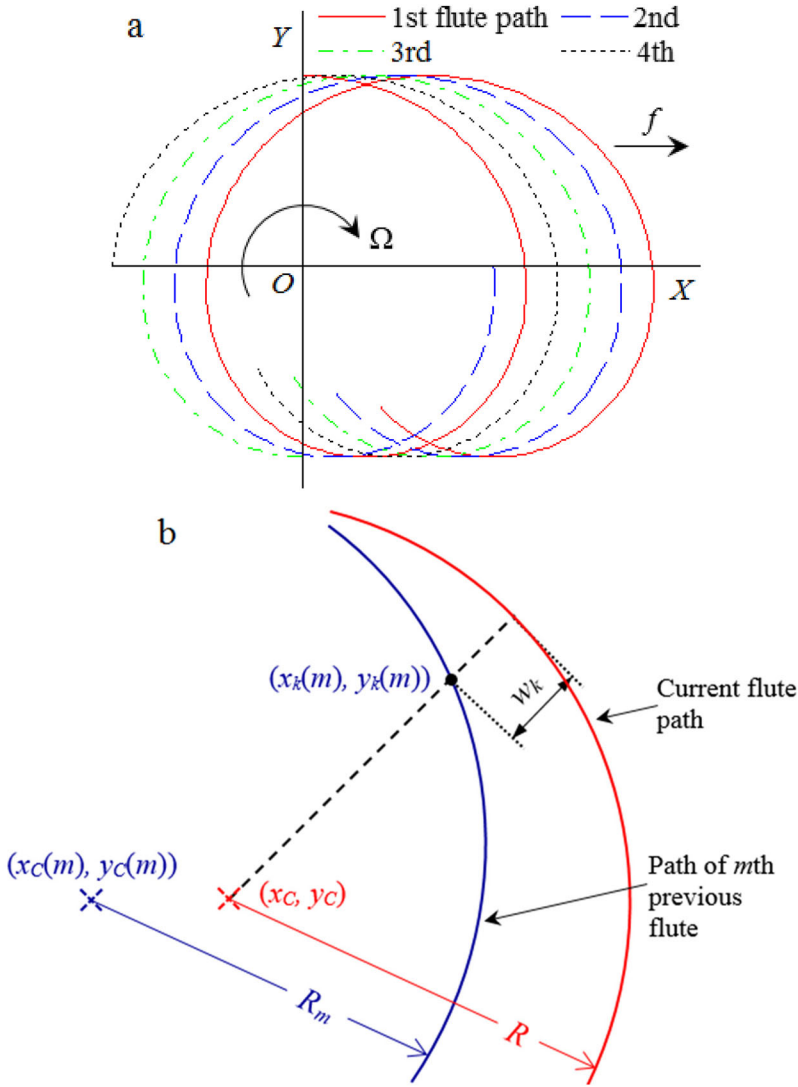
Helical-flute end milling with runout: (a) Trochoidal trajectory, (b) Chip thickness geometry.
